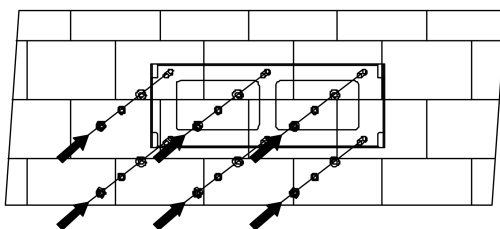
Fixing and Locking the Wall-mounting Bracket
